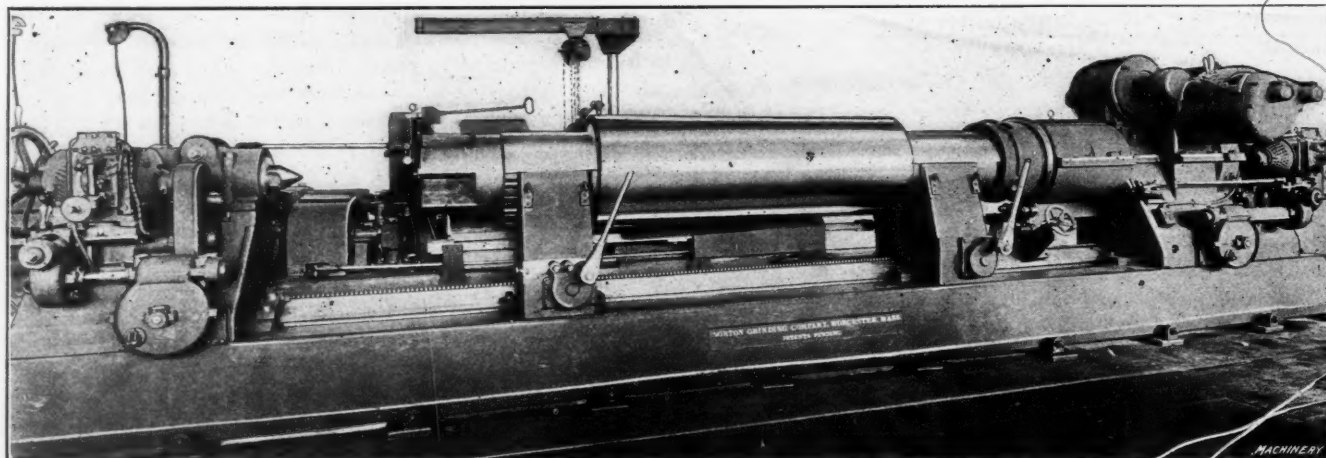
Rear View of Norton Roll Grinding Machine showing Roll in Position for grinding
